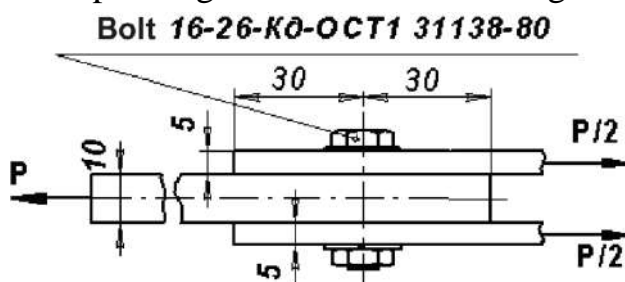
Geometrical model of single-bolt double-shear joint specimen executed to determine fastener compliance
